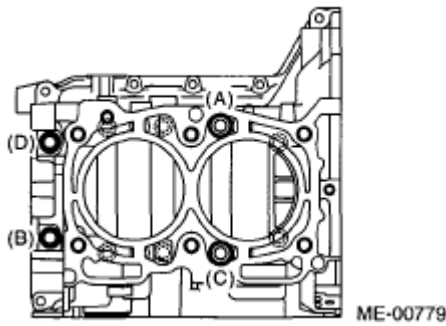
Identifying Cylinder Block Bolts Tightening Sequence (LH Side)
